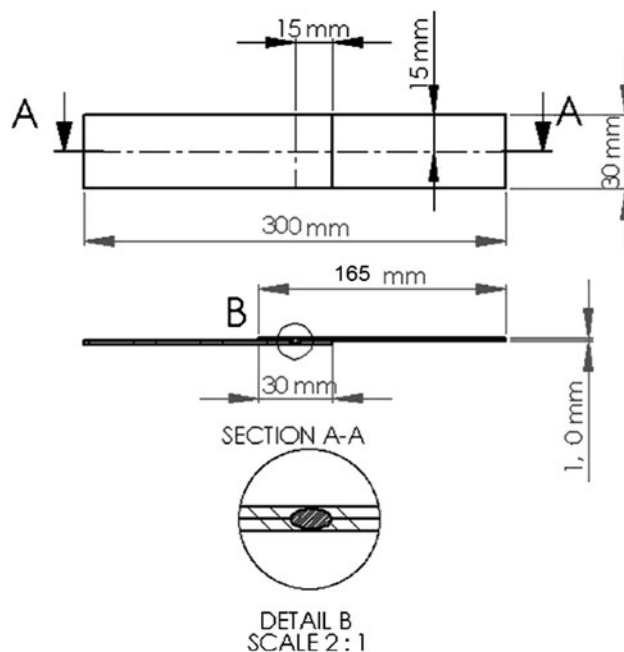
Specimen sizes in electrical resistance spot welding
